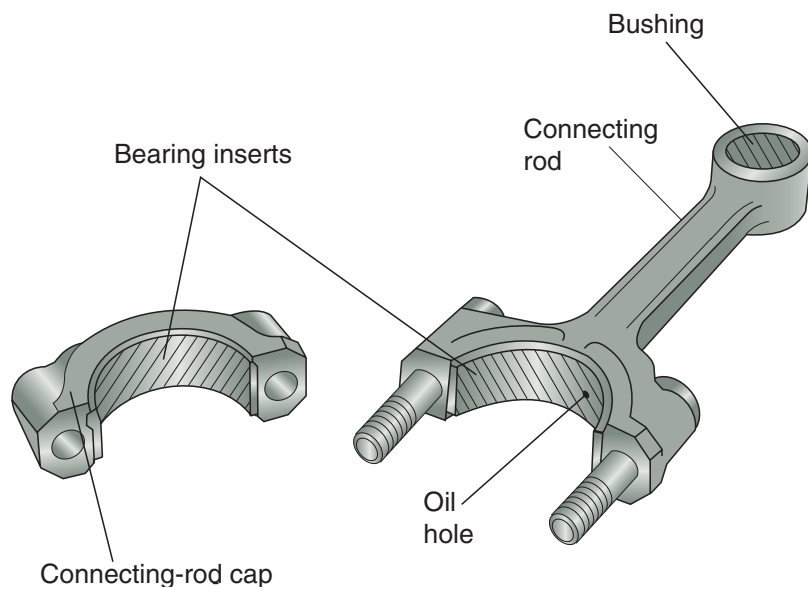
Plain bearing inserts and bushings can support large radial loads. In many cases in small power equipment engines, the bearing surface is machined instead of using an insert bearing.
